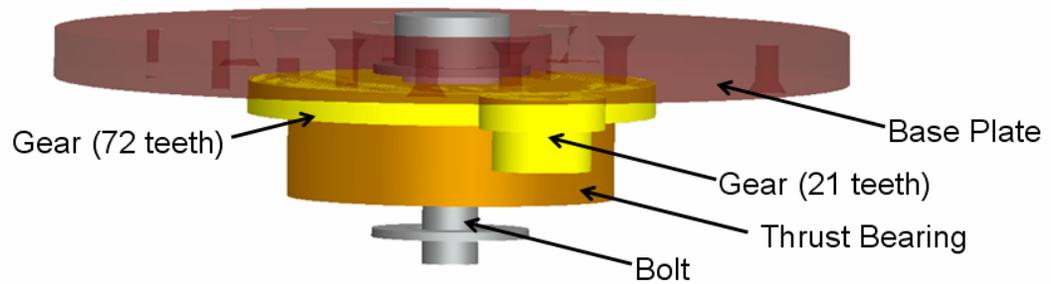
Gear (72 teeth) resting inside thrust bearing and mounted to circular plate.
